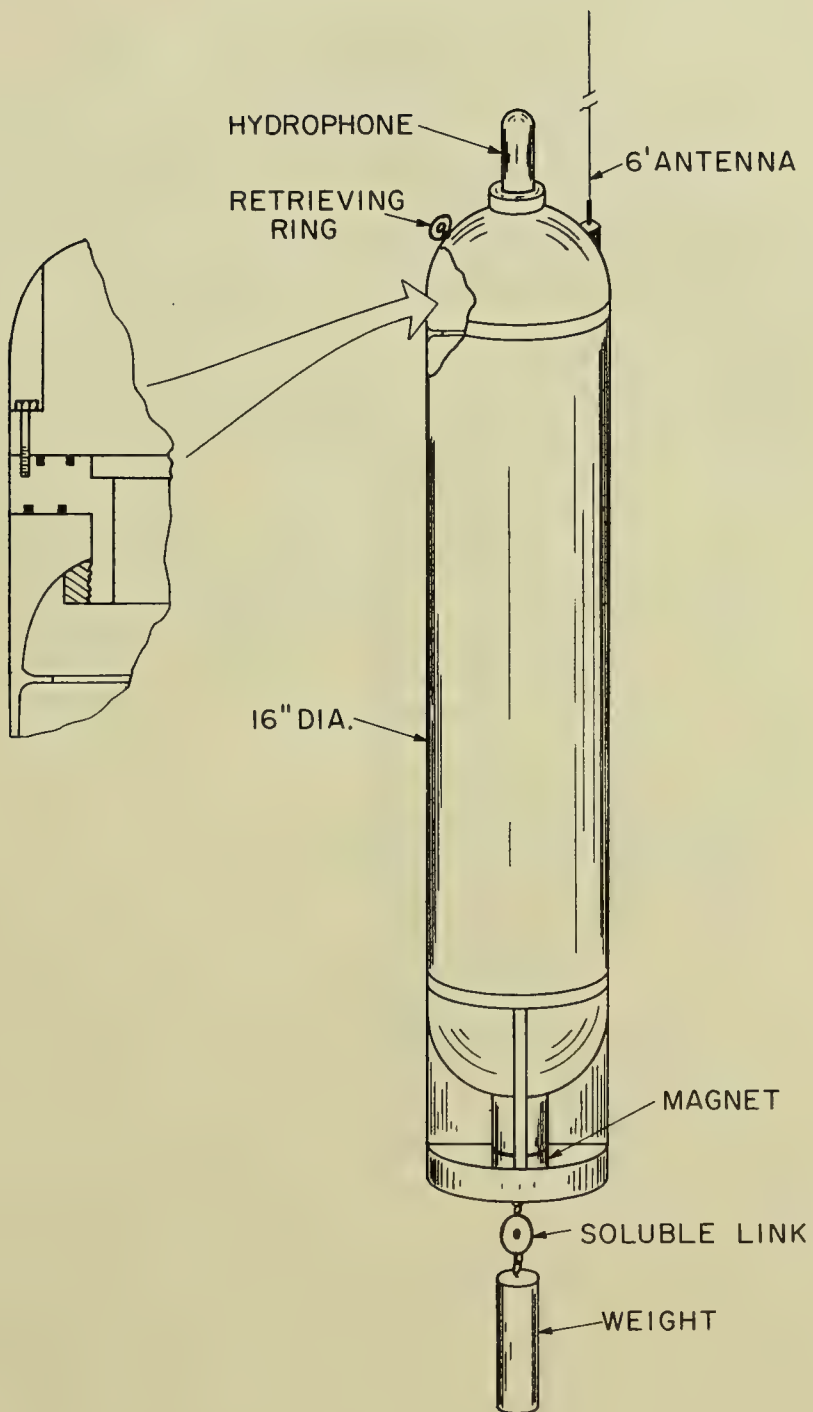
DIVEAR CAPSULE ASSEMBLY
